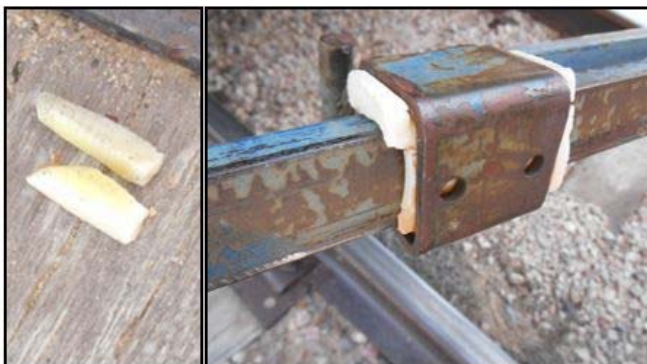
Broken Pieces of an Uncoupling Lever Insert
